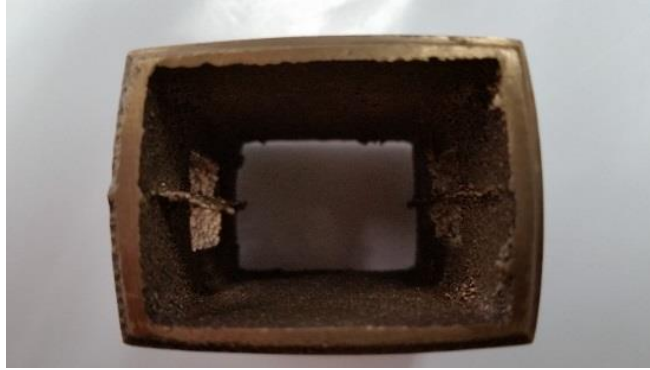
Inside the center of the sand cast hammer before post processing.
